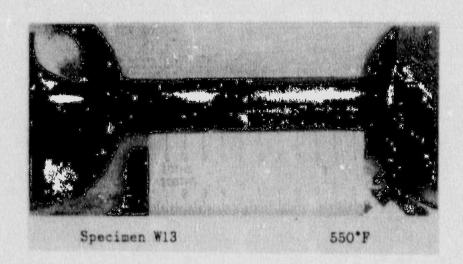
FRACTURED TENSILE SPECIMENS FOR ZION UNIT 2 REACTOR VESSEL WELD METAL
